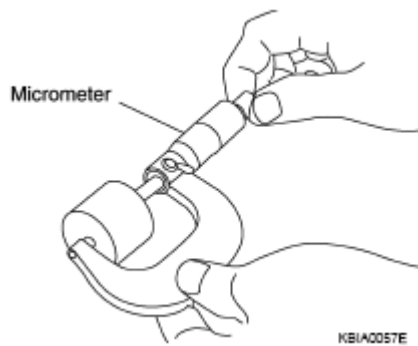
Checking Center Thickness Of Removed Valve Lifters With Micrometer
